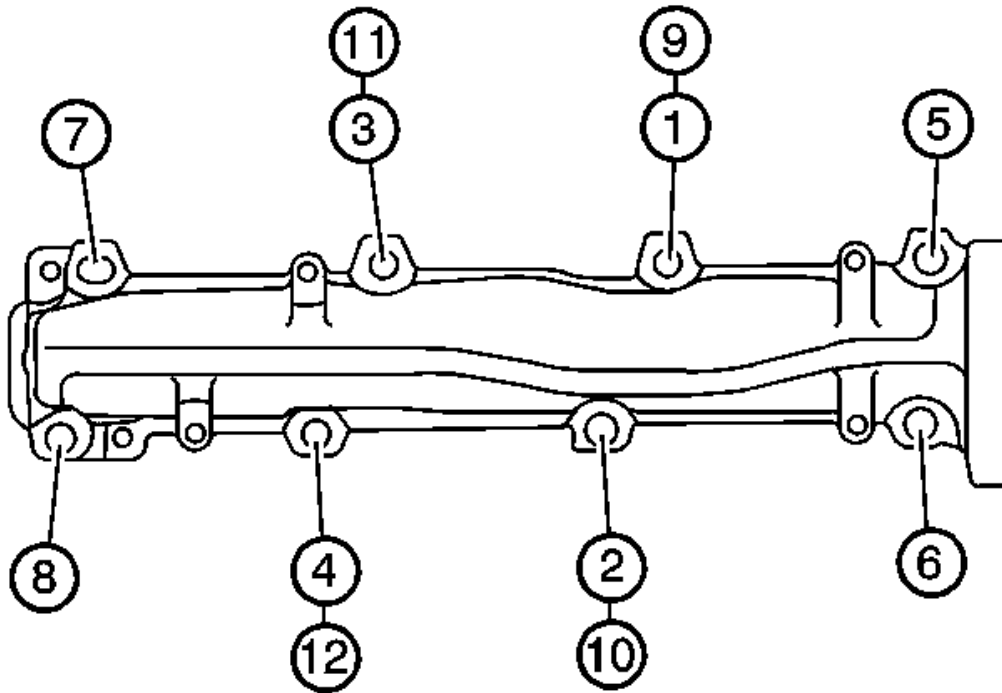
Exhaust Manifold Bolt Tightening Sequence -- Left Side
